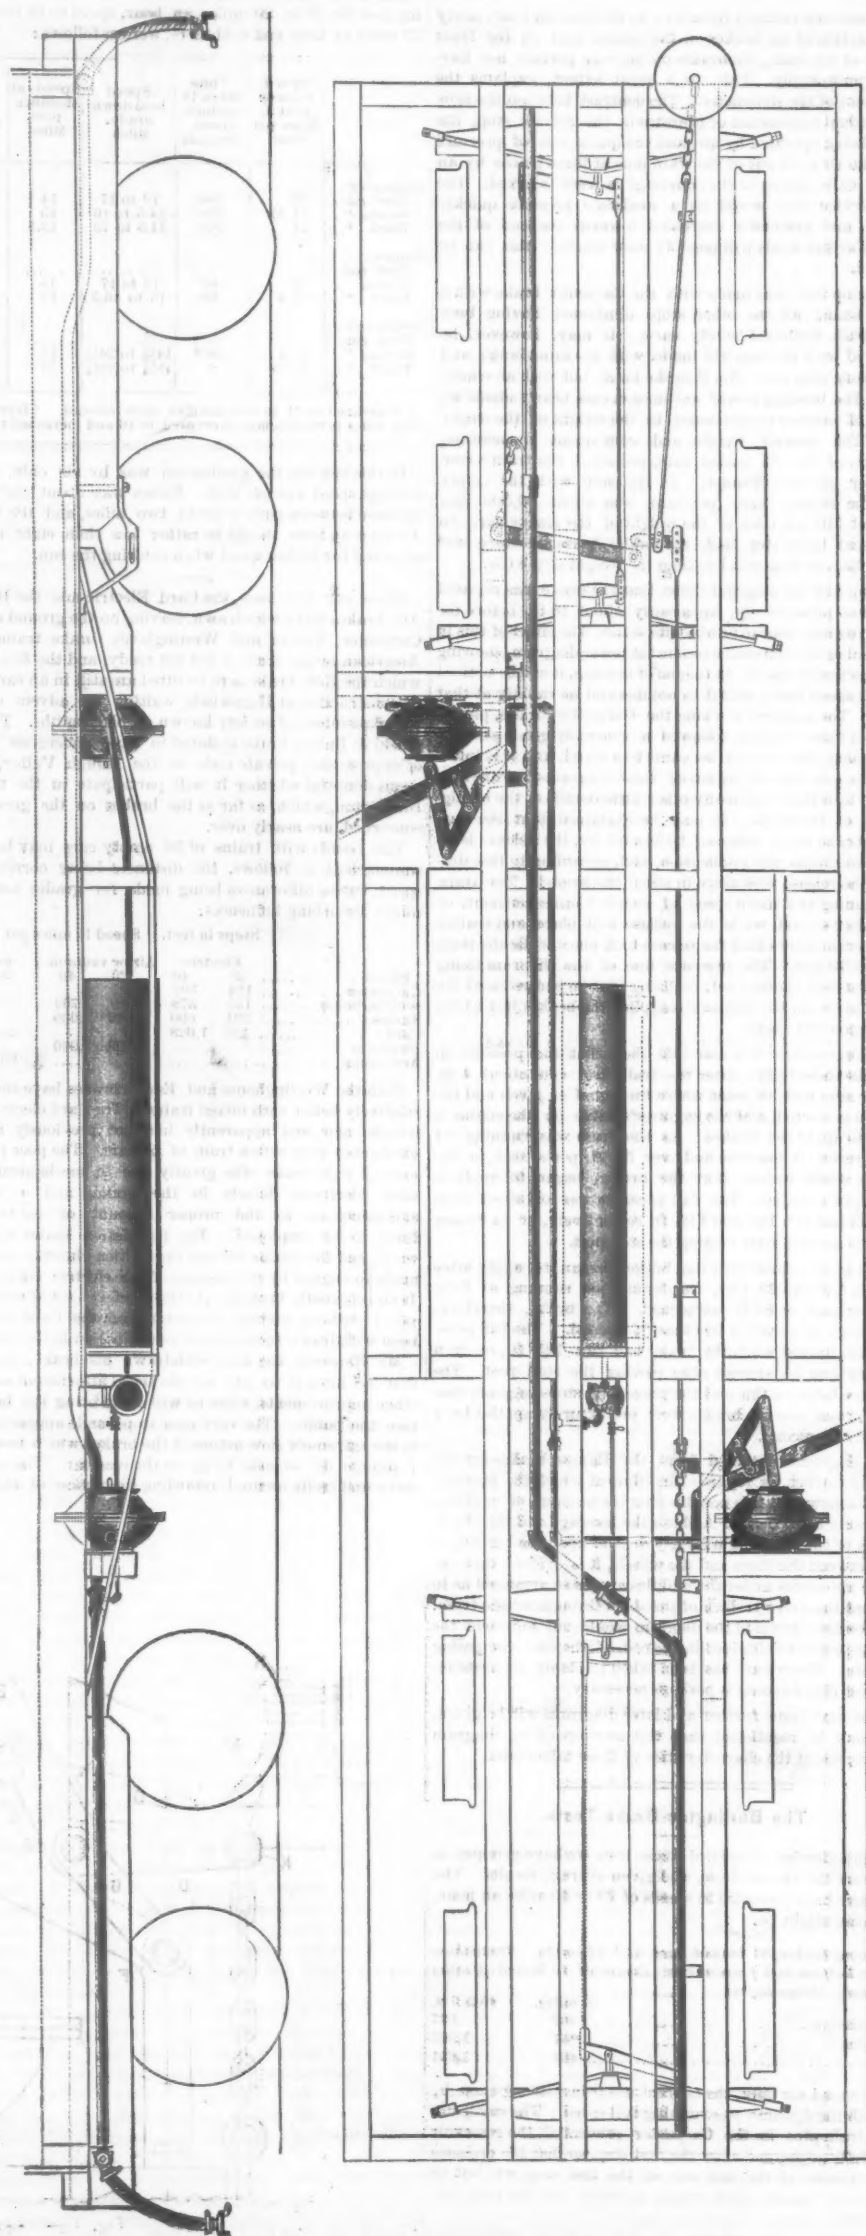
Eames Brake, Plan and Elevation of Apparatus on Car.
